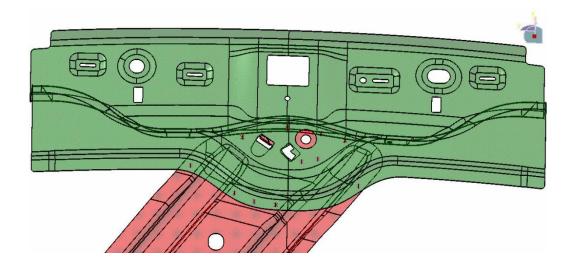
Connection between Rail Guide and rear roof cross member with 11 weld spots. The components have 1mm and 0.9mm thickness respectively.
